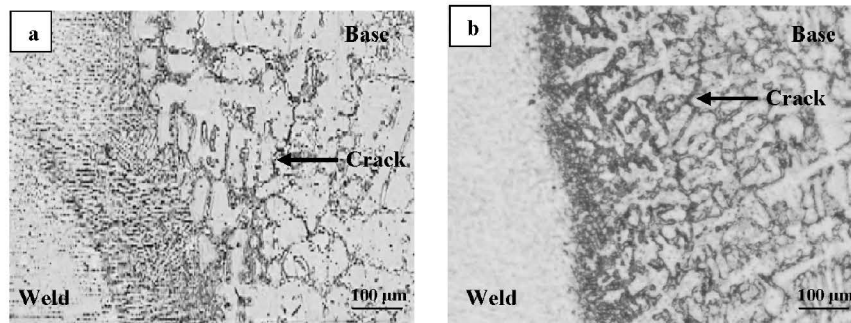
Interfaces between the weld metal and aged HP steel base metal in different heat inputs: (a) 820 J and (b) 710 J.
